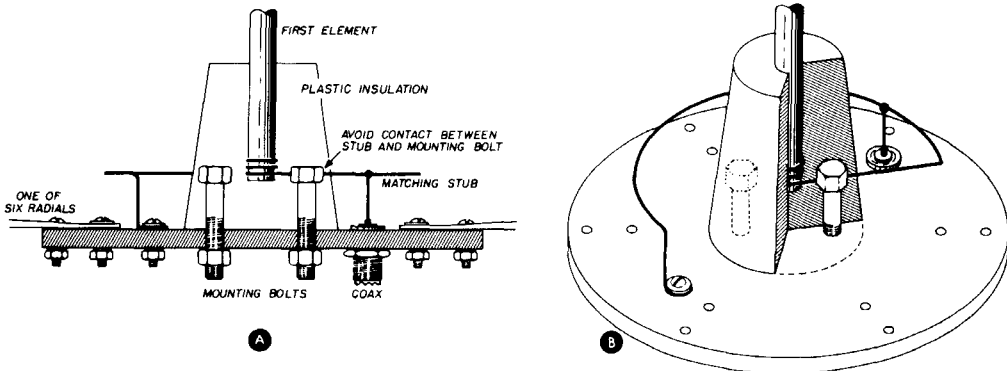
Detail of center insulator, bottom matching stub, and radial anchor plate, A. View B shows the assembly in perspective.
